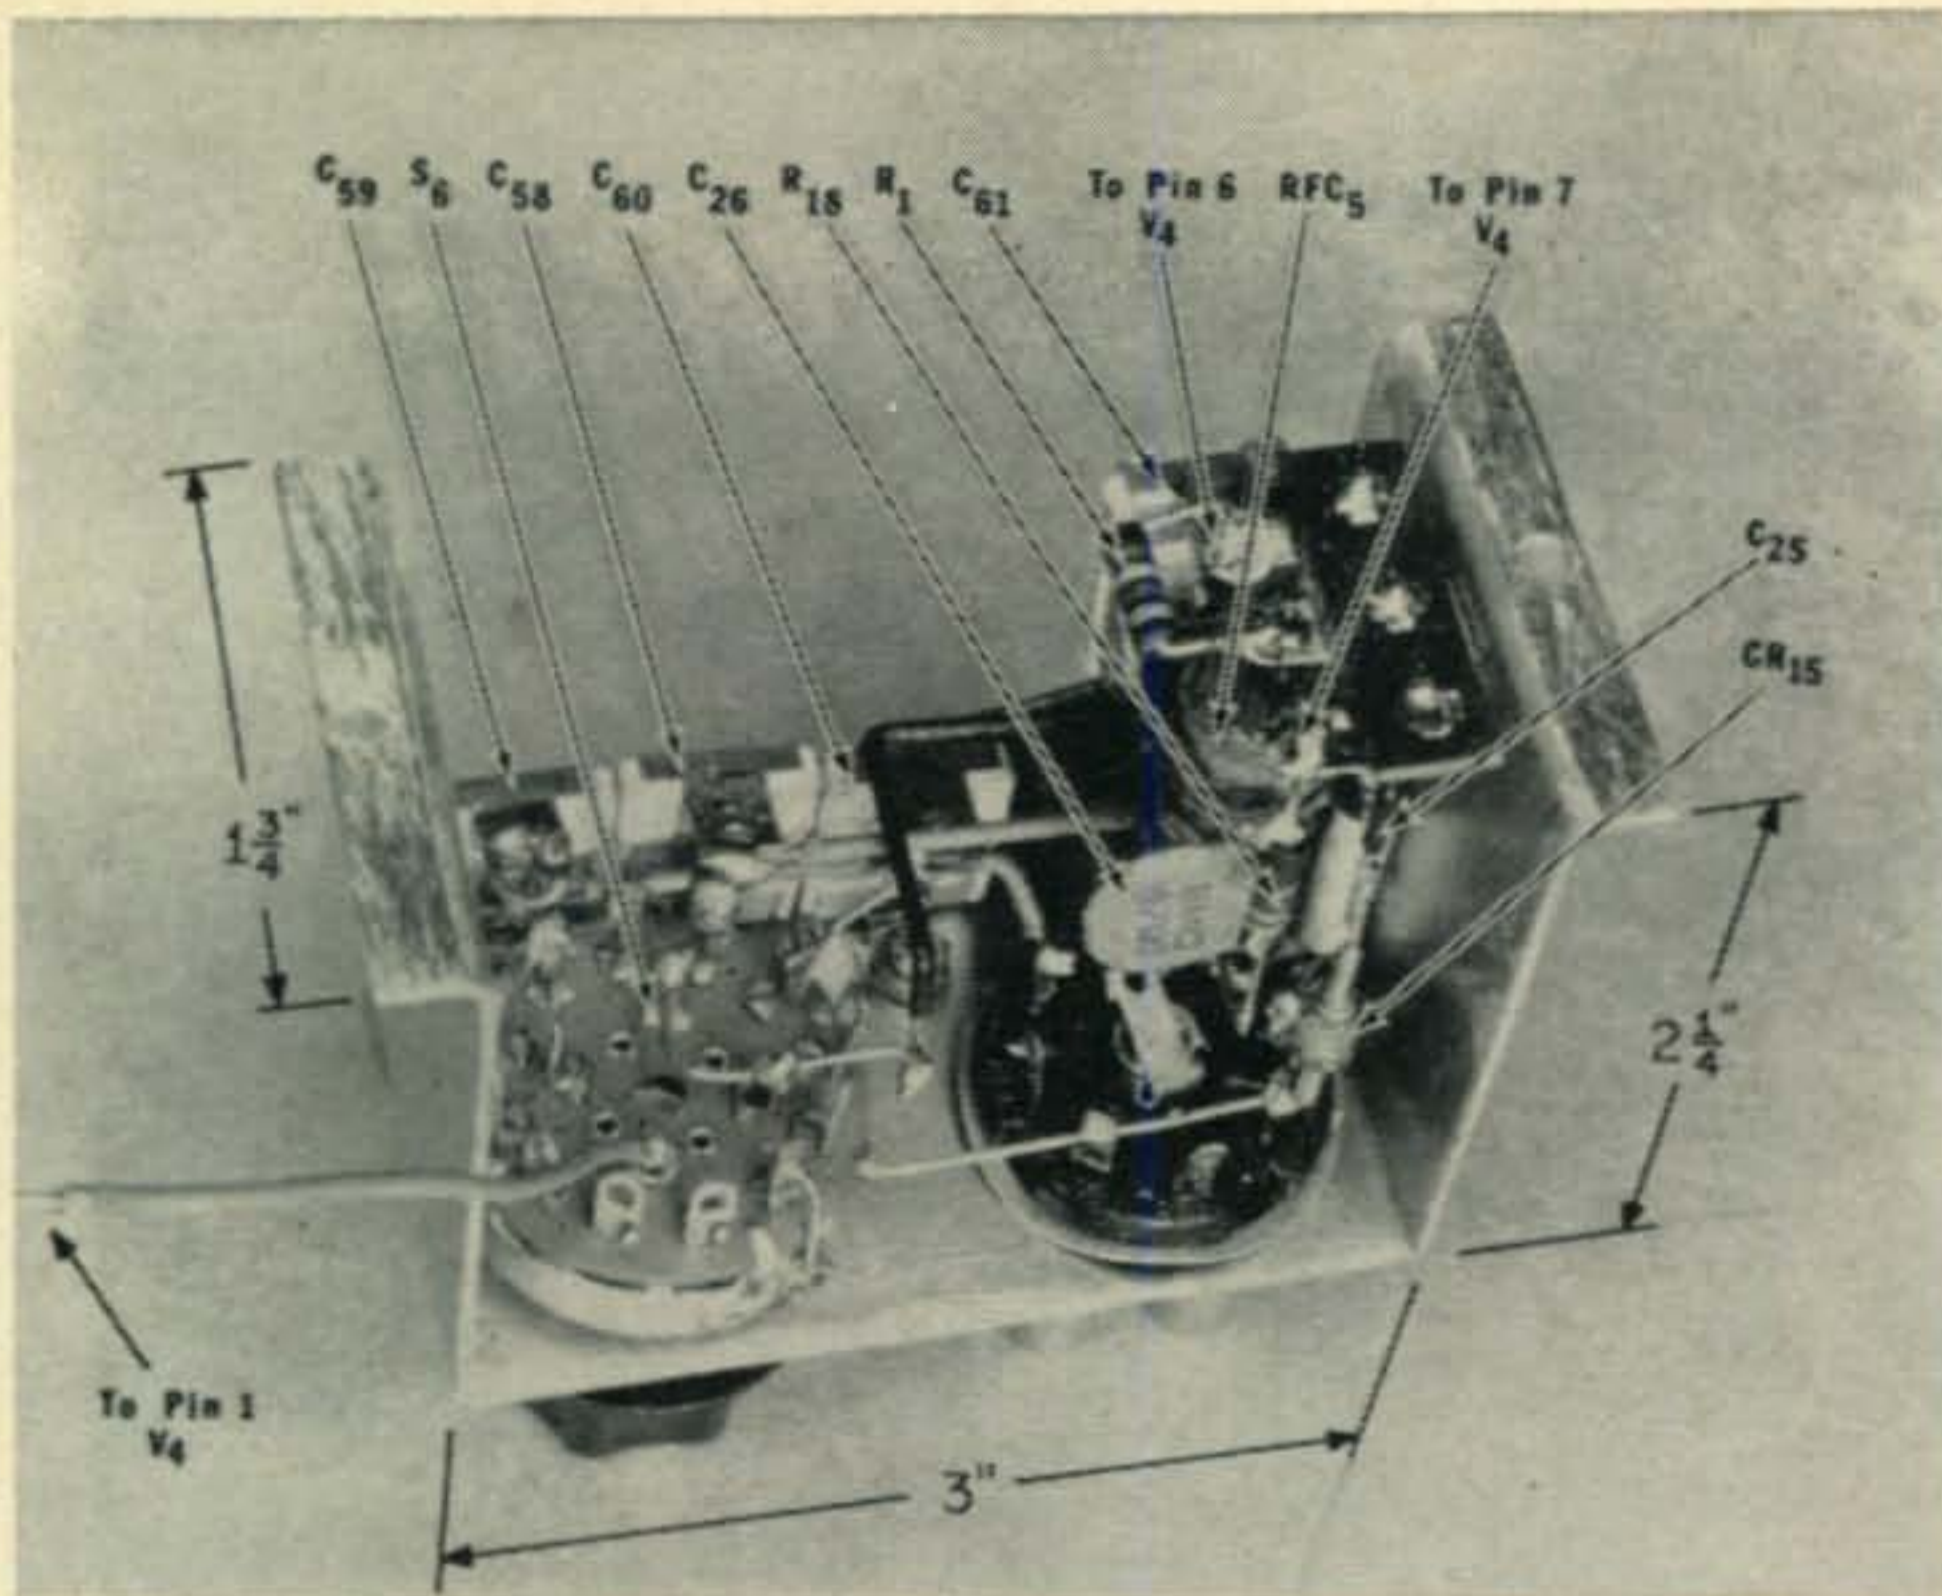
The bottom view of the U-bracket containing the carrier oscillator components. Switch S_6 is the UPPER-LOWER S.B. selector.
